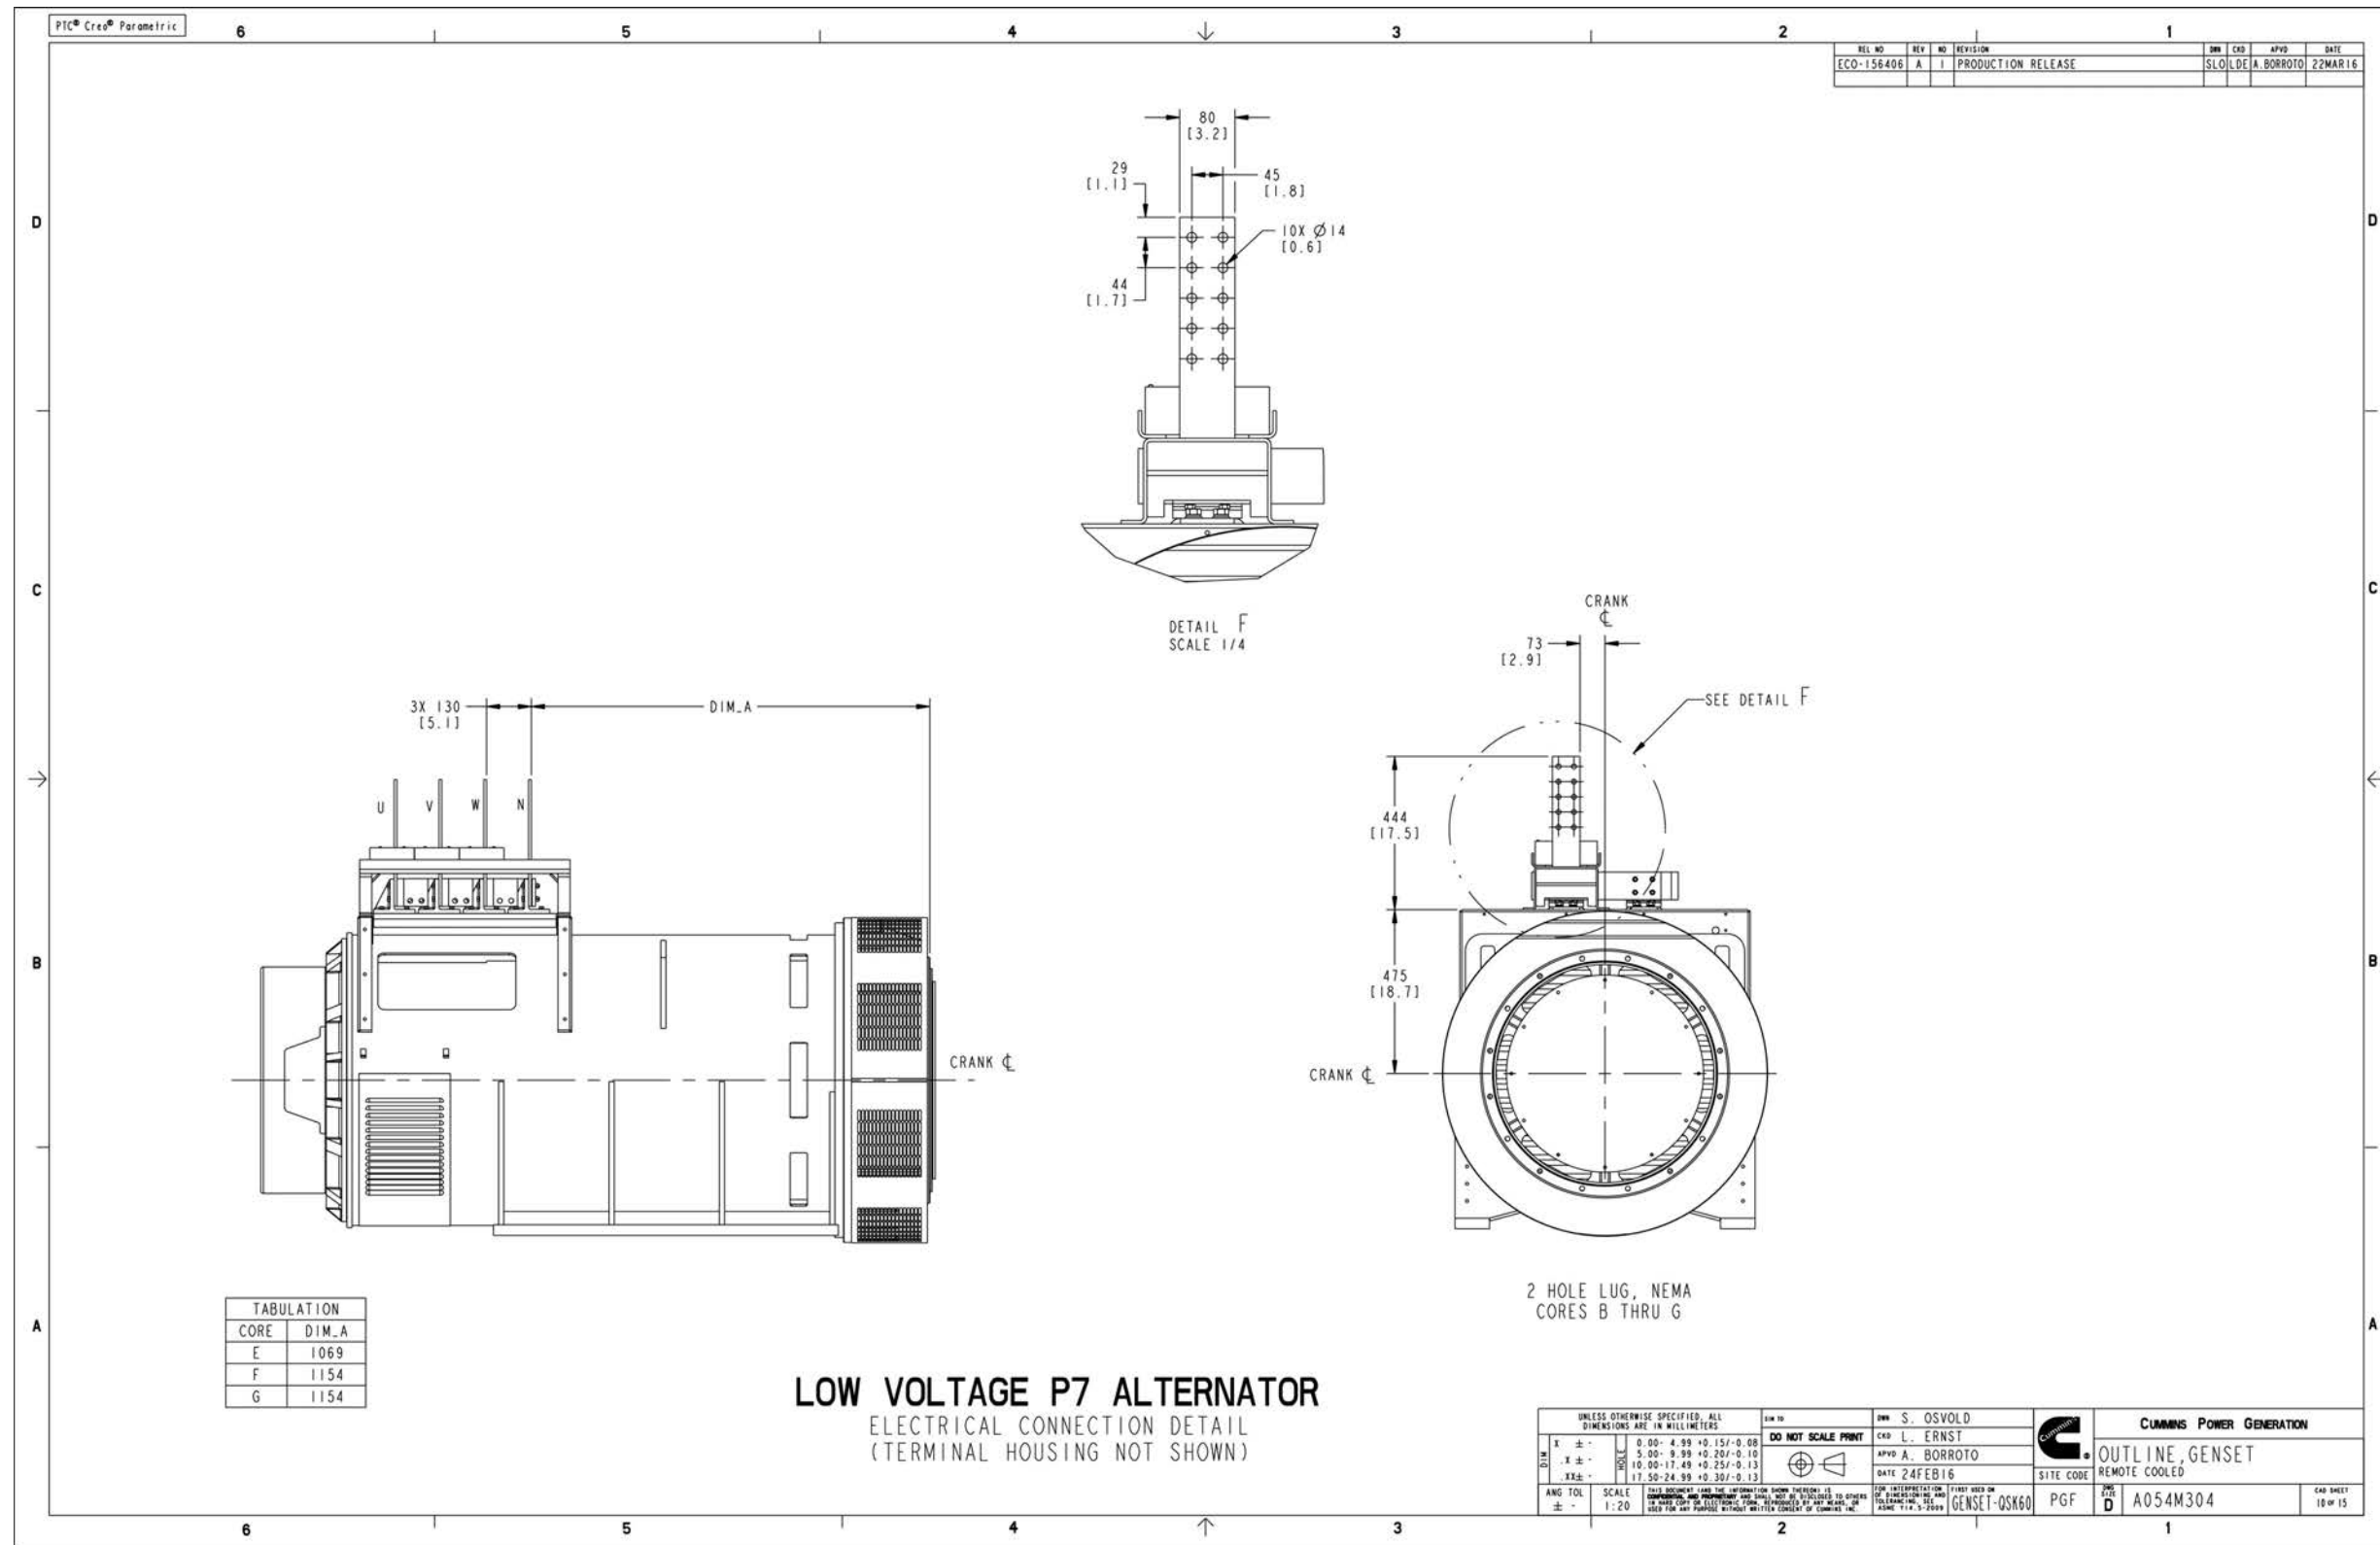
GENERATOR SET WITH REMOTE COOLING OUTLINE DRAWING (SHEET 10)
